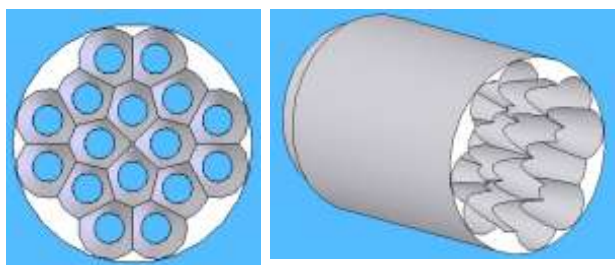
Nozzle D8/16 (16x ø 8 mm holes) [15, 16]
